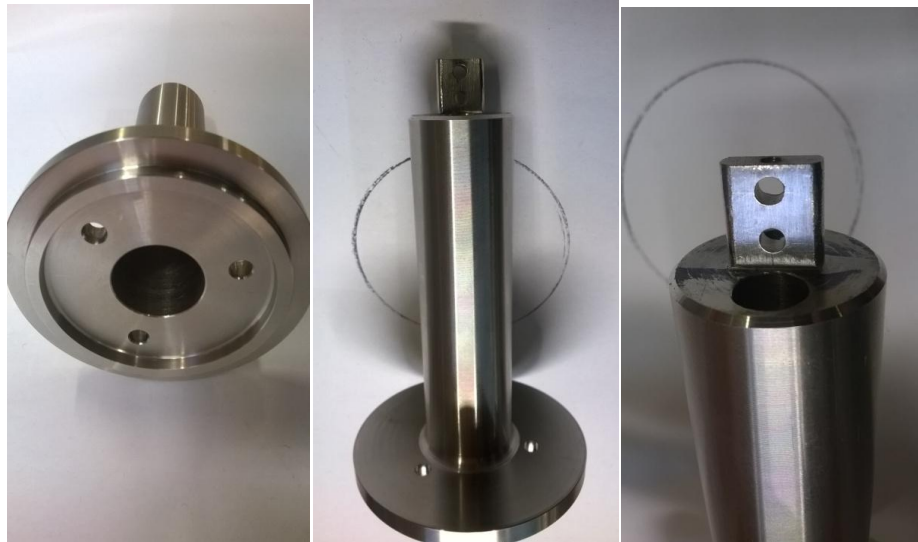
Minimole Coupling, from left to right: top view, showing spigot; side view; bottom detail showing sensor and cable holes.
